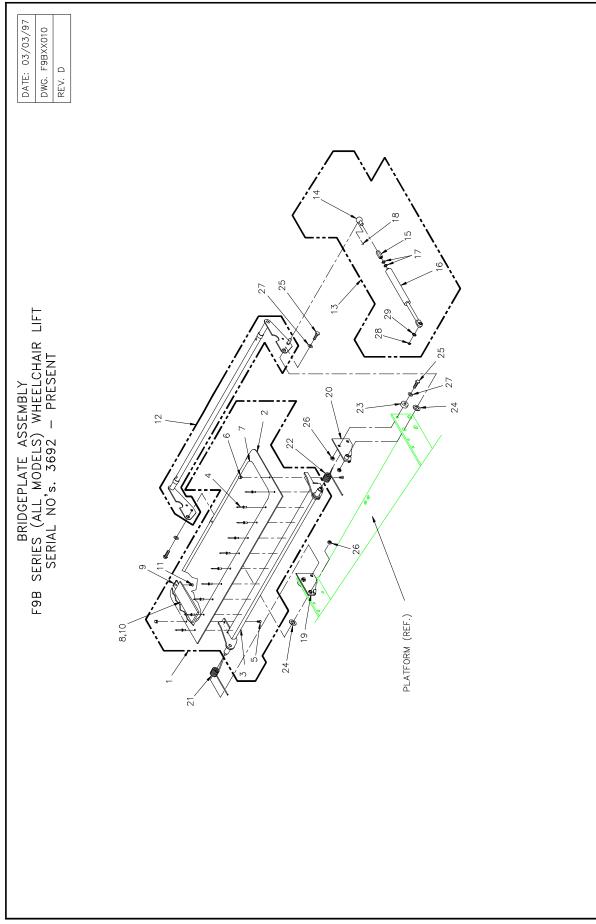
BRIDGEPLATE ASSEMBLY
